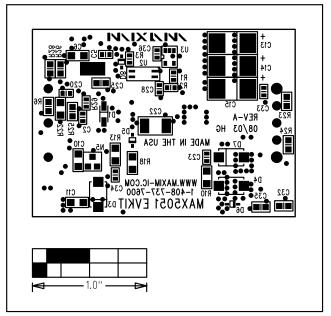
MAX5051 EV Kit Component Placement Guide—Solder Side
